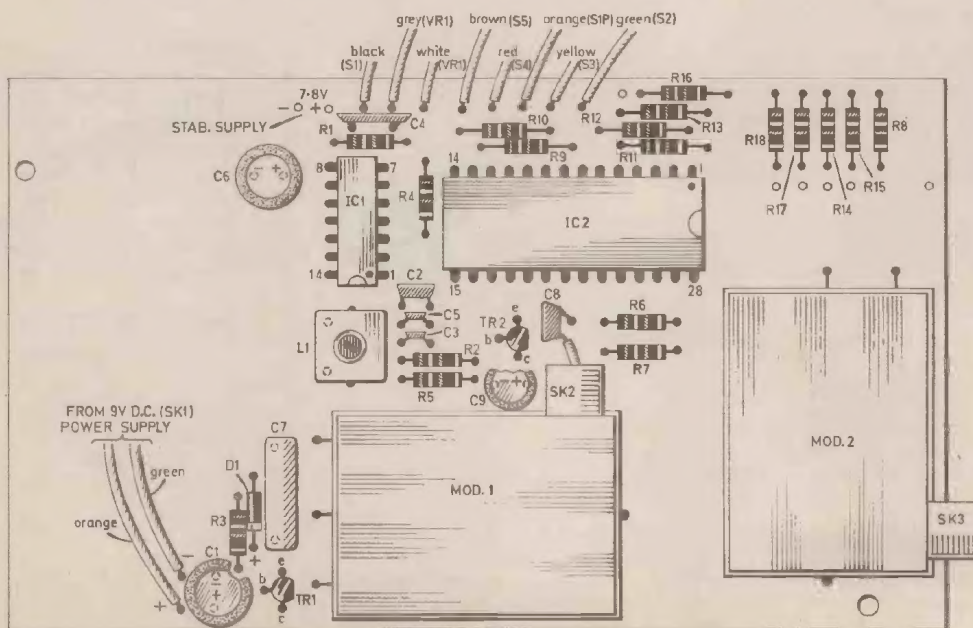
Top view of the p.c.b. showing location of components and flying leads to front panel and Jack socket.
